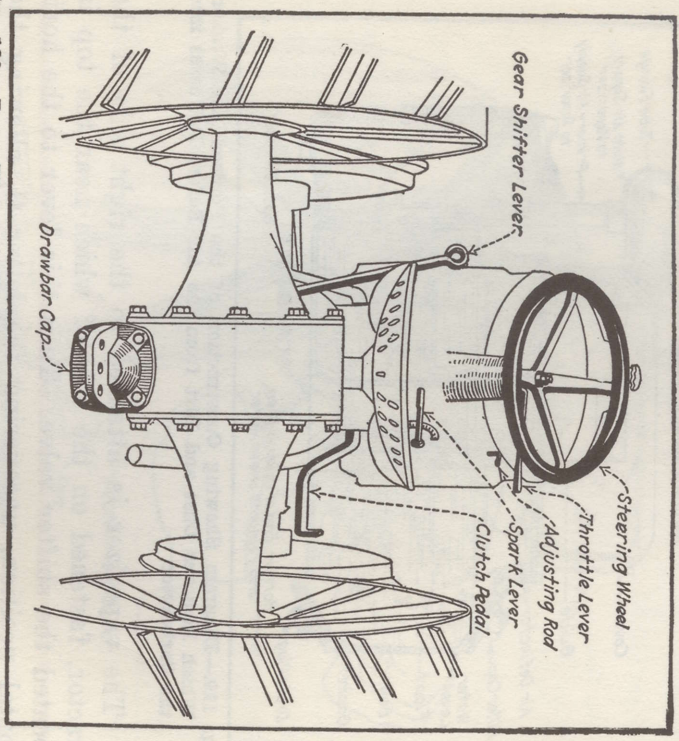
Rear View of Fordson Tractor Showing Control Members and Drawbar Cap.
